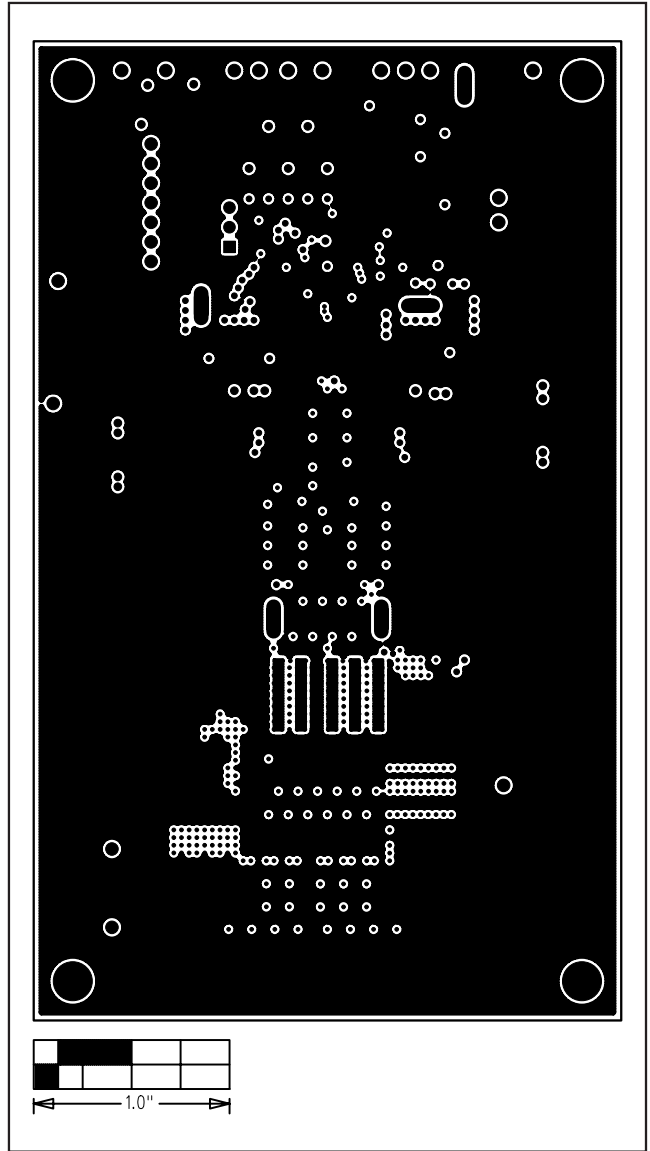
MAX17082 EV Kit PCB Layout —Internal Layer 7 (PGND Layer)
